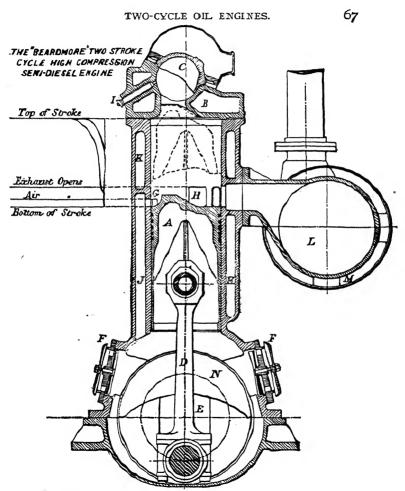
A. Piston. B. Cylinder cover. C. Combustion chamber. D. Connecting rod. E. Crank. F. Air inlet valves. G. Scavenging air ports. H. Exhaust ports. I. Fuel injection nozzle. J. Scavenging air passage. K. Water jacket. L. Exhaust silencer. M. Water jacket. N. Balance weight.
